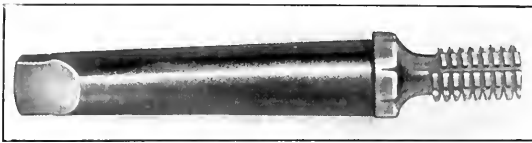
Worm-shaped Hob for producing the Teeth in the Generating Hob
